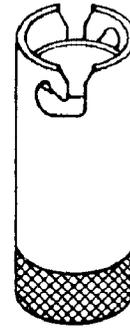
Respirator Assembly Test Set Components - A/E47T-28 (Sheet 1 of 3)
